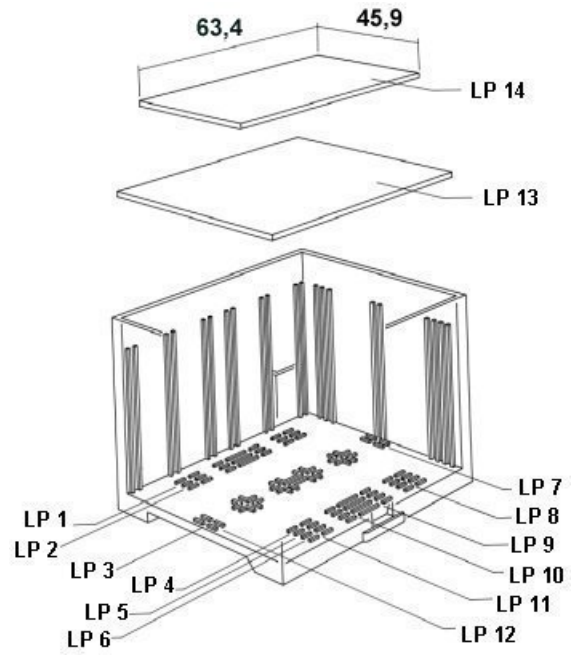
Explosion drawing 2 - Valid for PCB 14.
